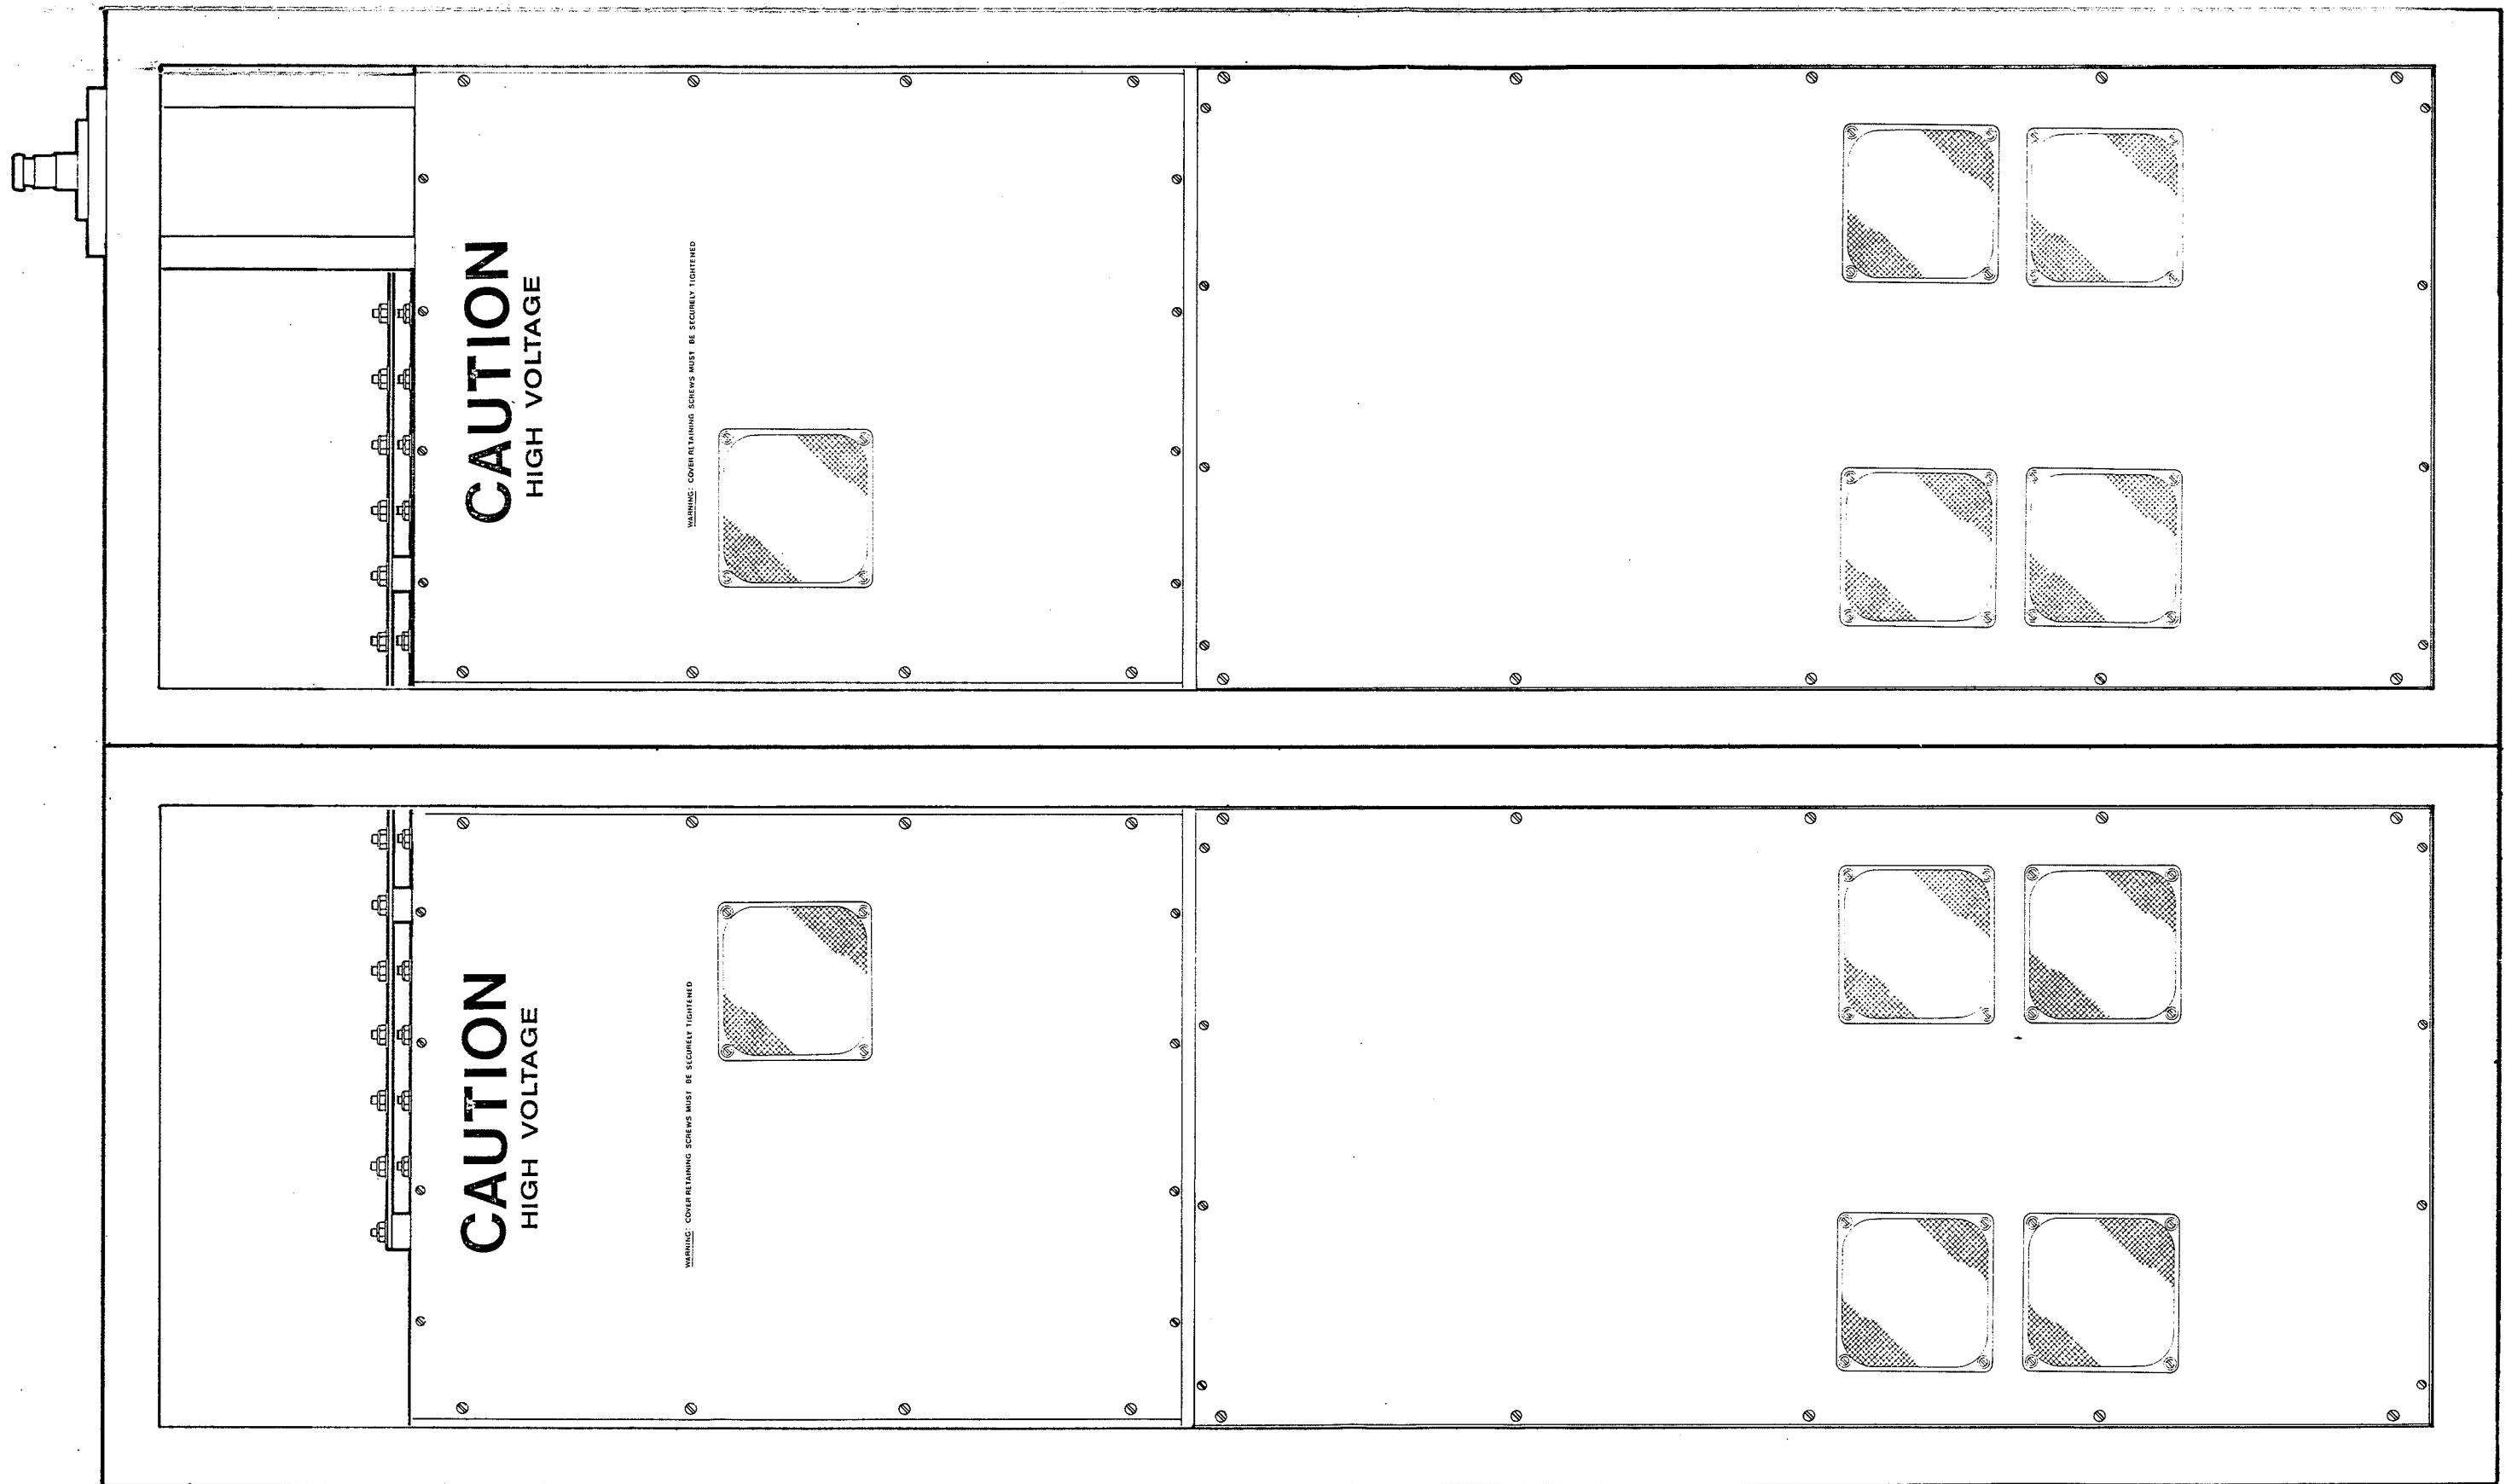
Assembly Detail - NAR72 Final Filter/Power Supply Cabinet (Rear View)
